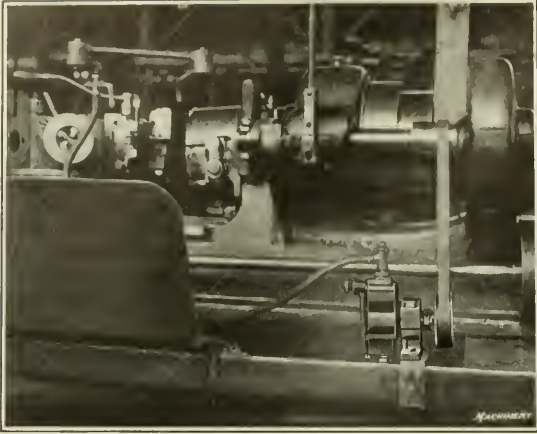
Geared Pump in Use, showing Method of mounting, driving and delivering Lubricant to Work
